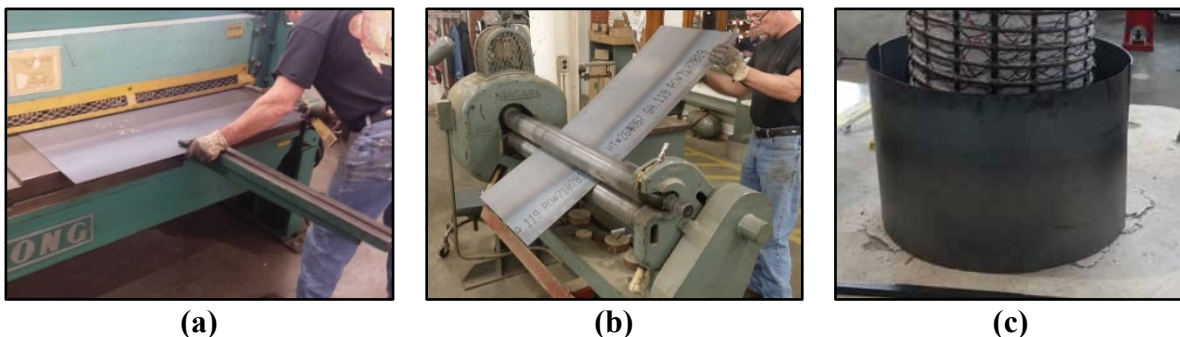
(a) Shear cutting of steel sheet; (b) Cold rolling of sleeve; (c) Final sleeve form.
